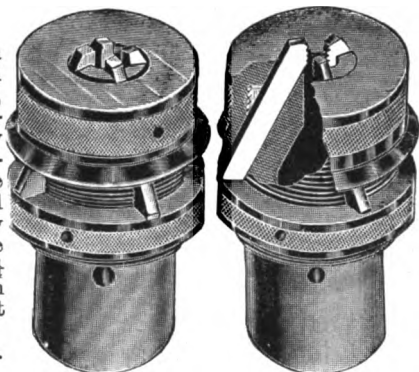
ADJUSTABLE THREAD CUTTING AND MILLING TOOL.
